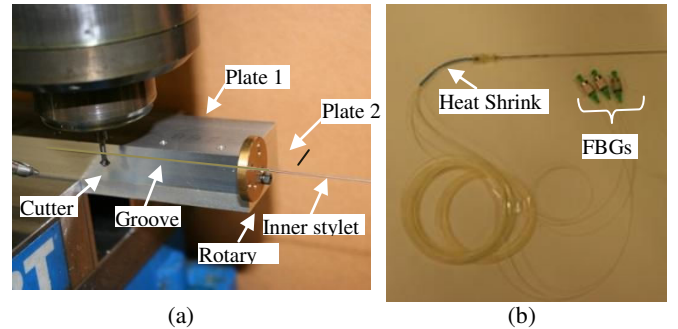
(a) Jigs and milling machine for making three grooves along the 0.6 mm needle at 120 degree configuration, (b) Needle prototype.
